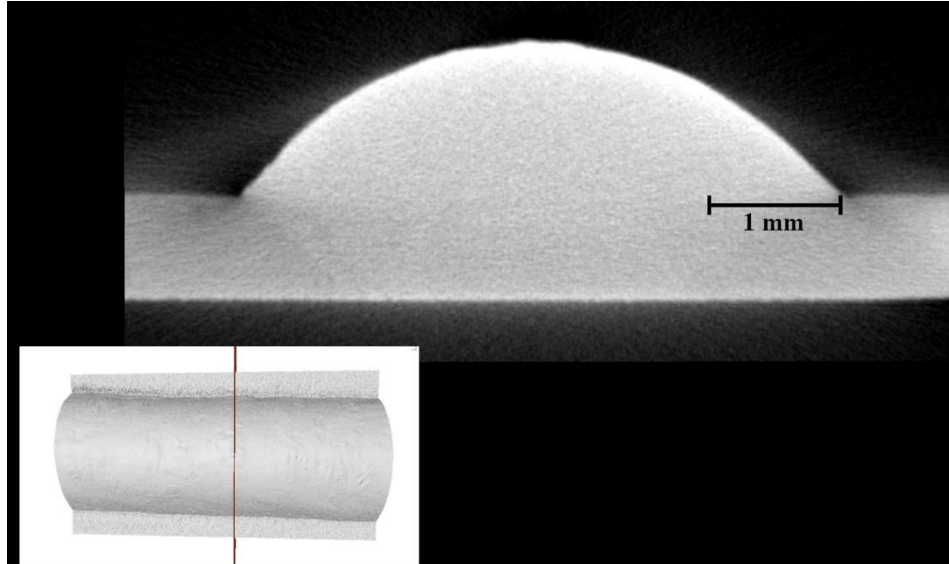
Single Bead Weld Camera Experiments
